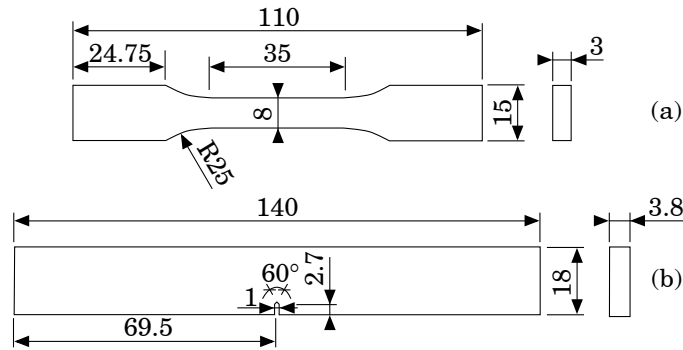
Specimens geometry for tensile (a) and fatigue tests based on ASTM E647 (b).
